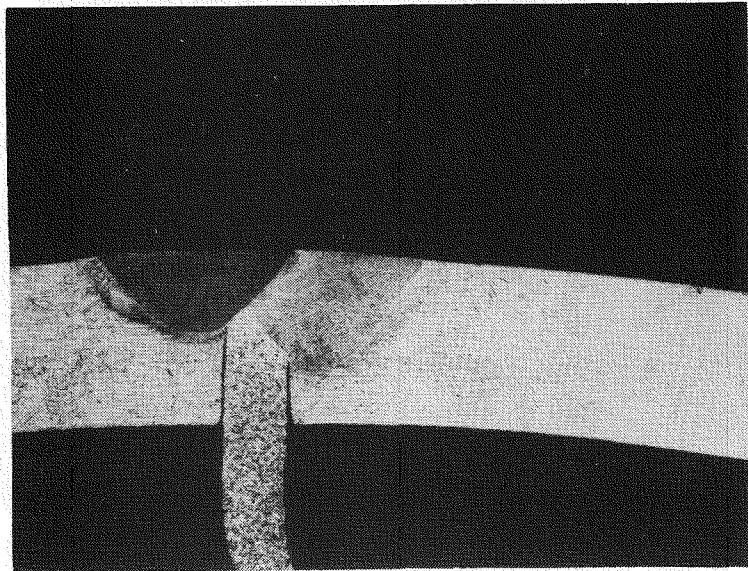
Typical metallographic cross section of pin weld.
